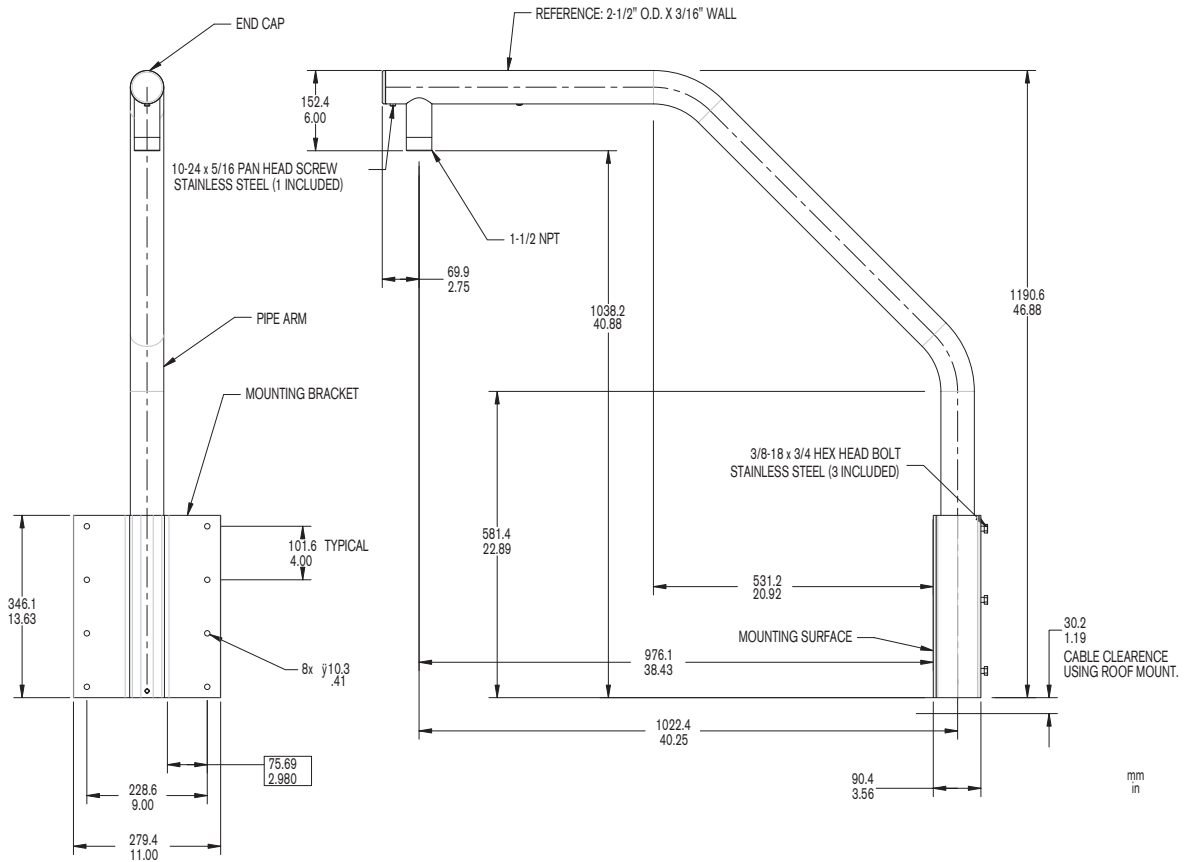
LTC 9230/00 Roof (Parapet) Mount
